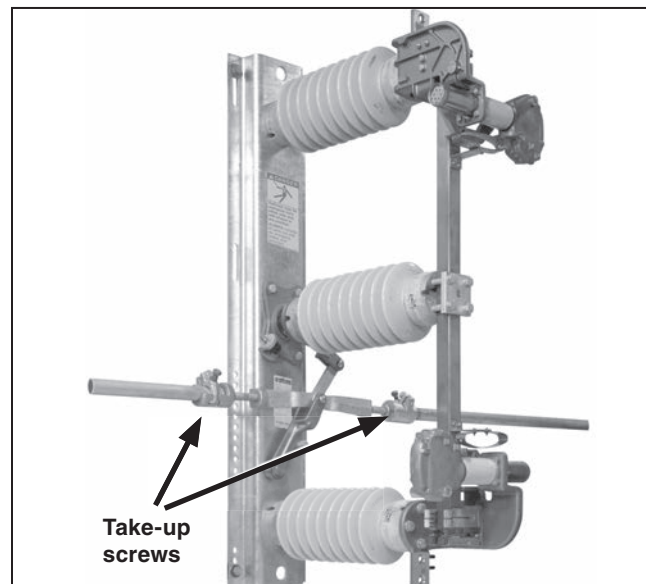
Readjusting the take-up screw(s) on the adjustable pipe coupling(s).
